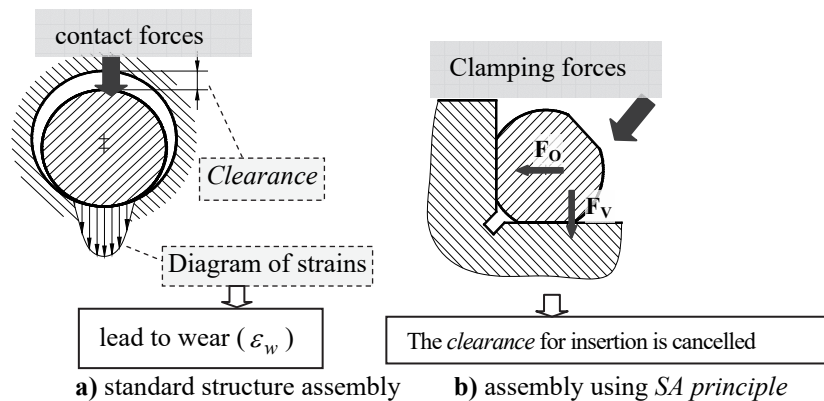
Draft of drawings for the assembly principle between a shaft and a bore
